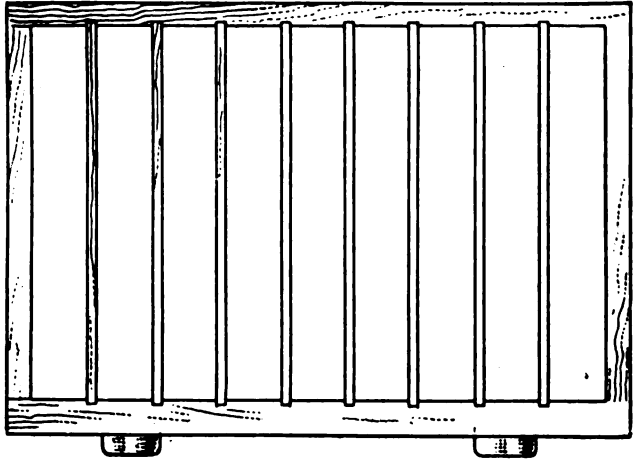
DRAWER PARTITIONED FOR DRILL RODS.
